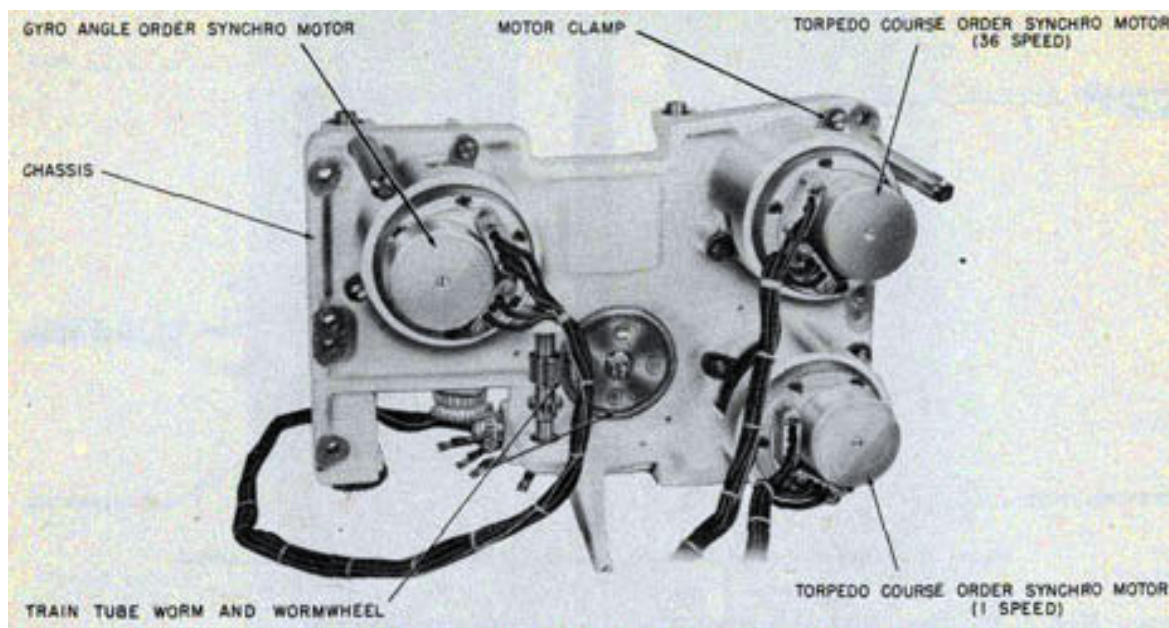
Torpedo course indicator chassis showing synchro mounting, rear view.
